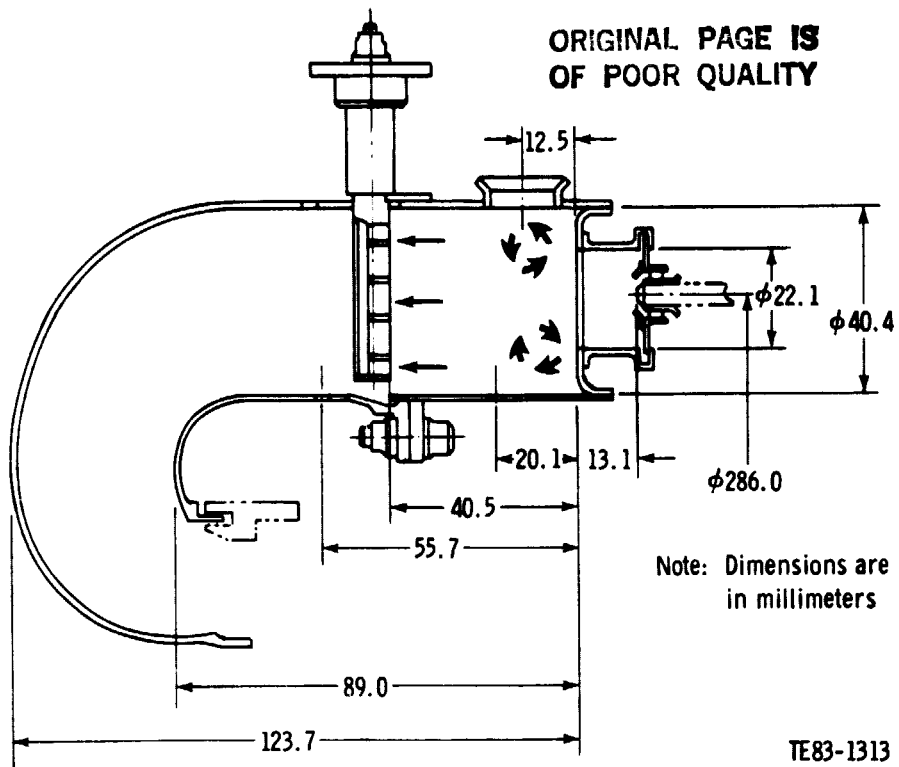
Dimensional cross section of Concept I, baseline, combustor.
